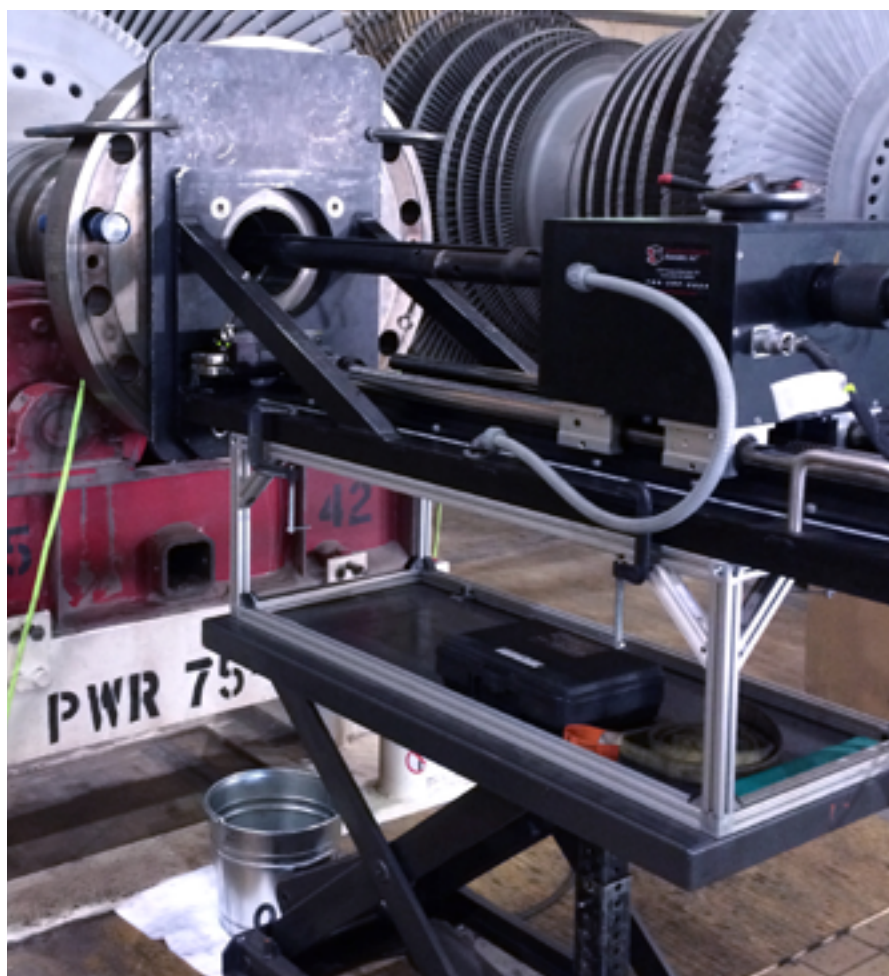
Boresonic inspection system mounted to the rotor for inspection of bore surface and near bore regions
